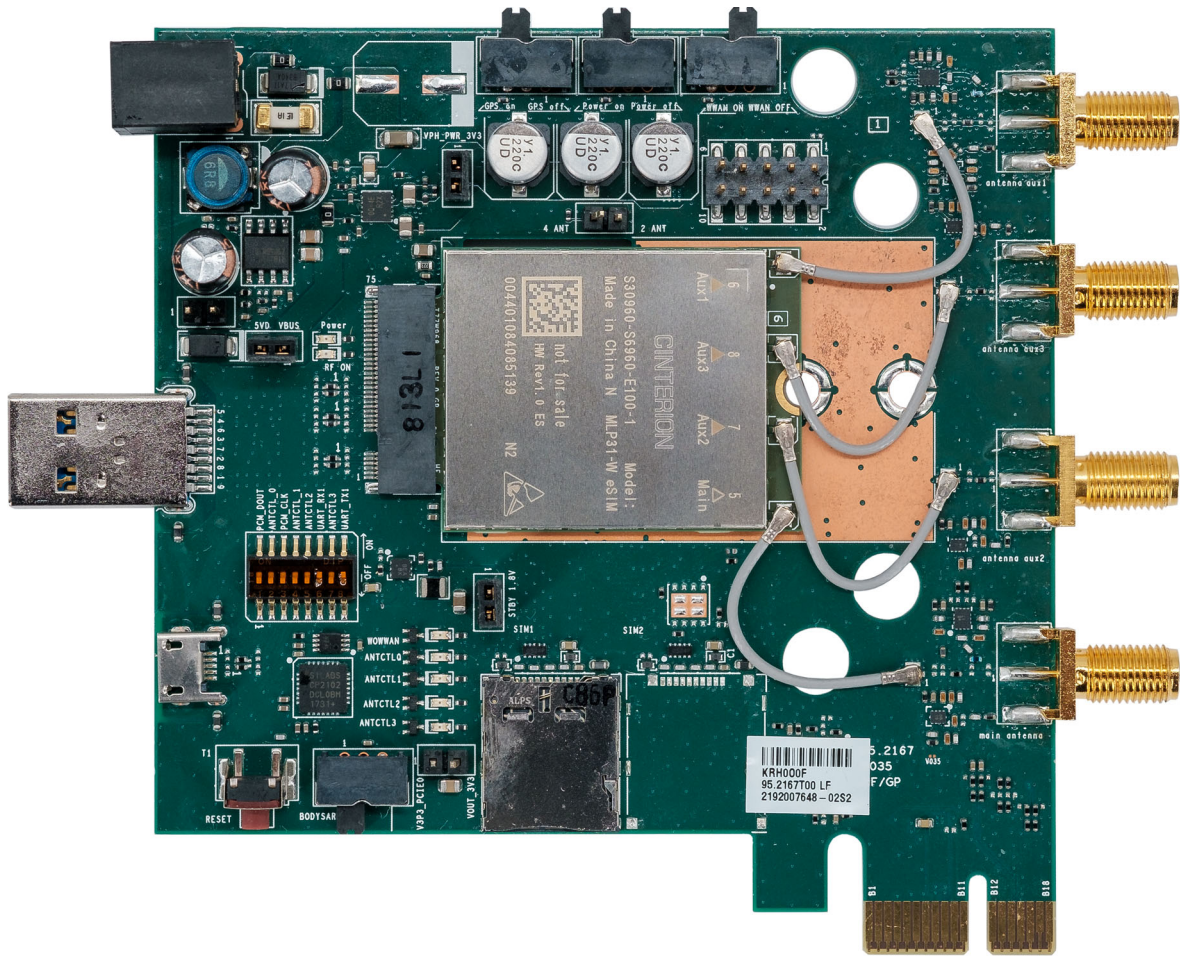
MLP31-W mounted on 4G Modem Card Adapter Board
